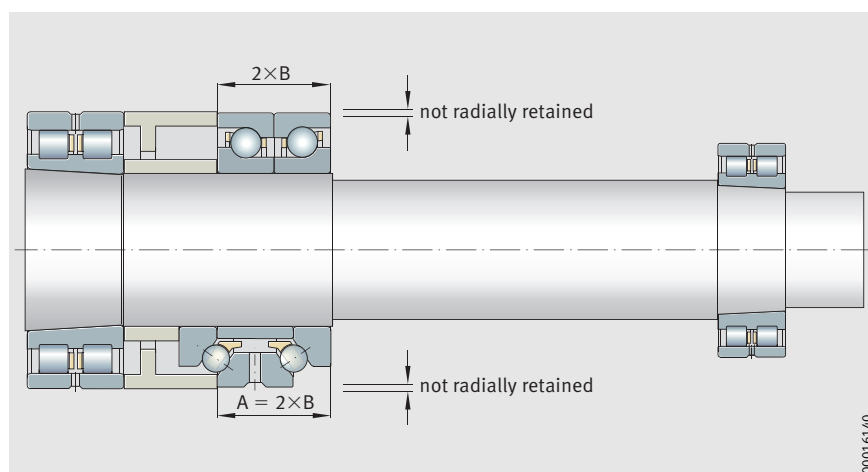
Comparison – BAX bearing with double direction axial angular contact ball bearings
